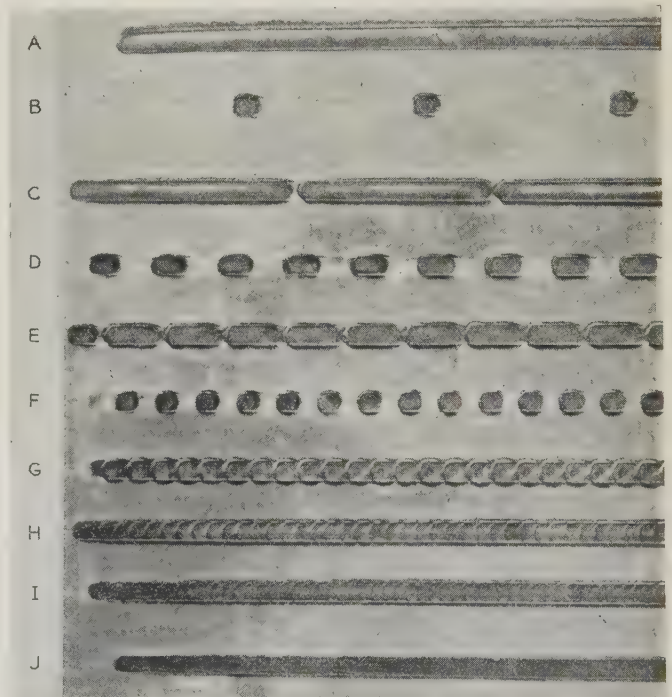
Resistance welds made at approximately 7 feet per minute by line welder controlled by a control panel using grid controlled vapor discharge tubes
